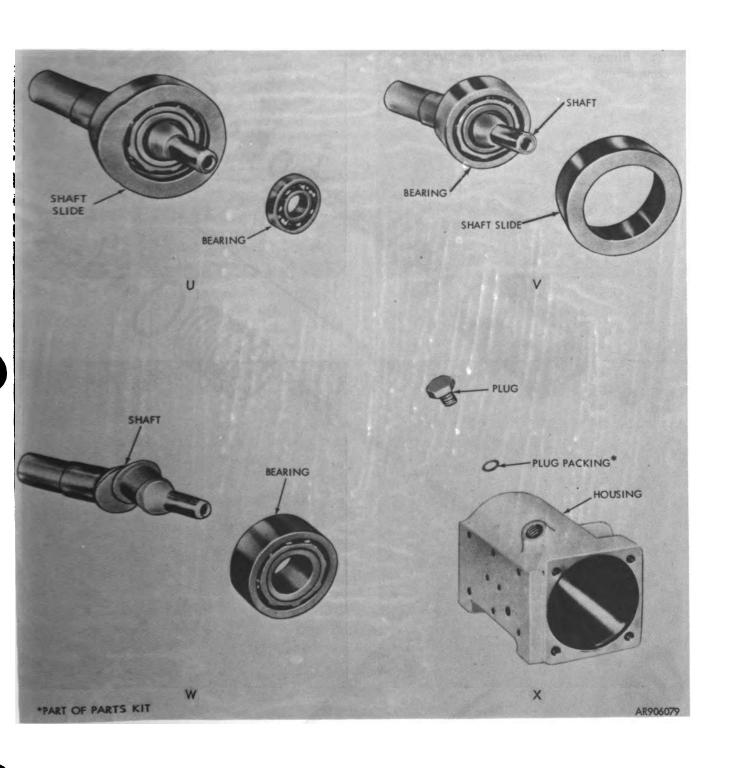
Manual elevation pump disassembly or assembly (4 of 4).
